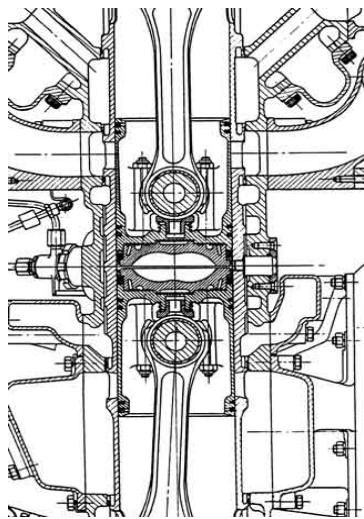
Section through Leyland L60 Liner, Piston and Injector
